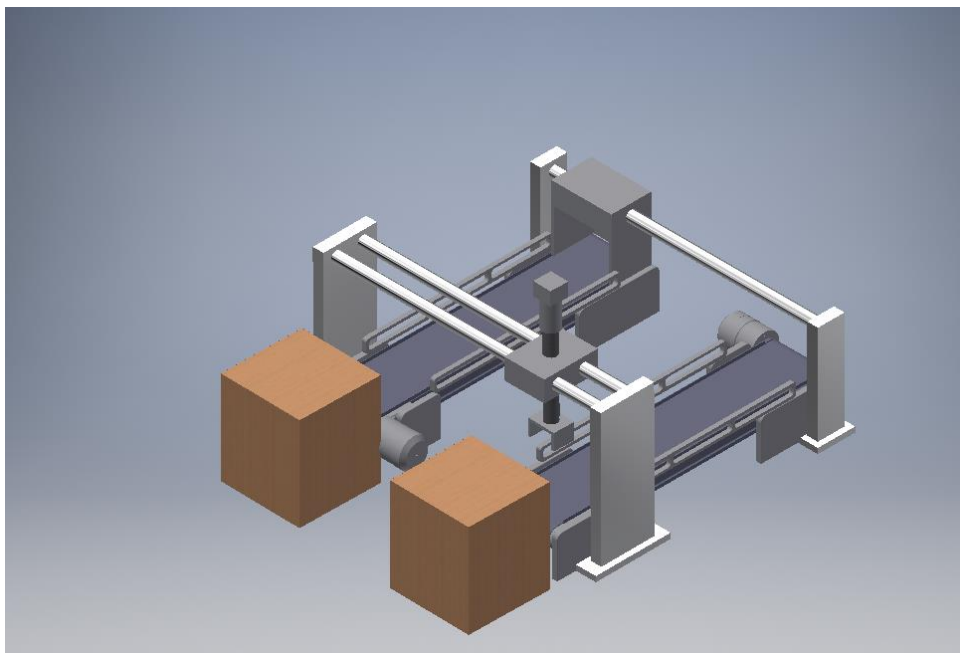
Prototype design of the machine in AutoCad Inventor. Back view
